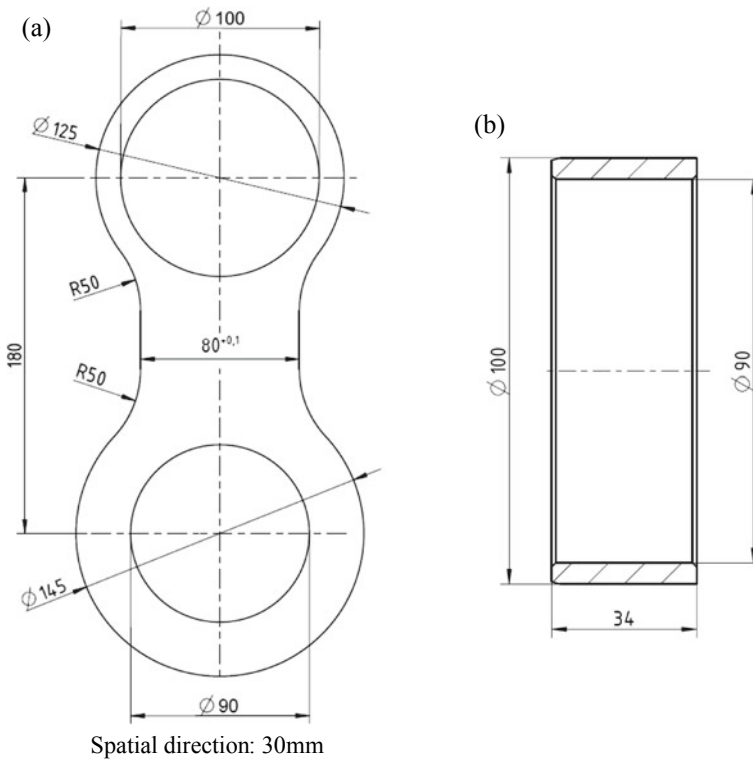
Geometry of the piston rod (a) and bushing (b)
